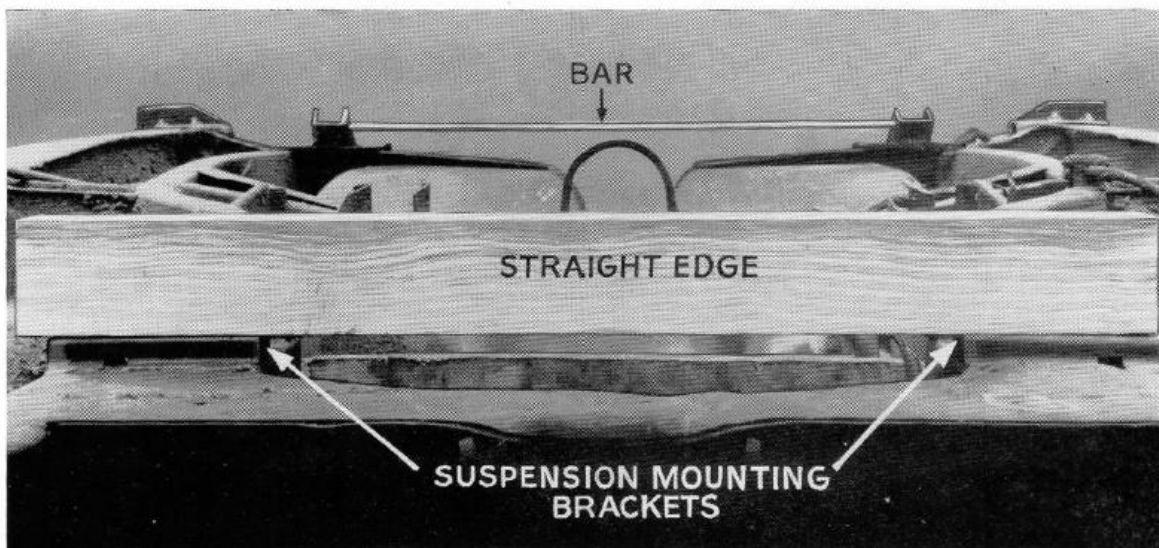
Bar and top of straight edge when viewed from the front in a horizontal plane, should be parallel with one another.
